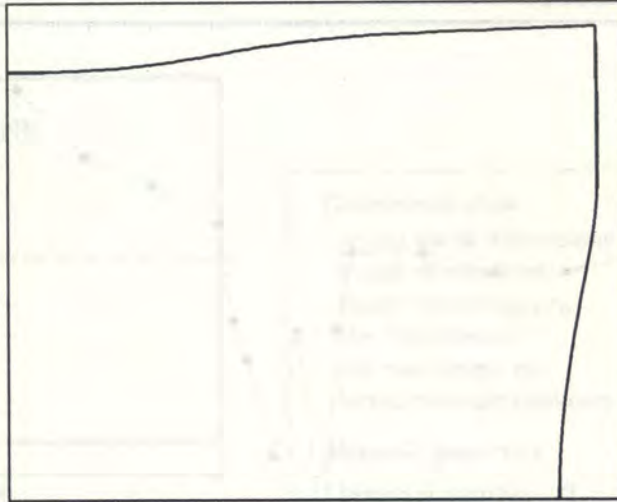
Prismatic test results. Deformed blank boundary for drawing depth 36.87 mm, radius 6 mm
